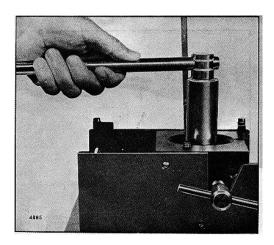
Removing Injector Nut using Tool J 4983-01
